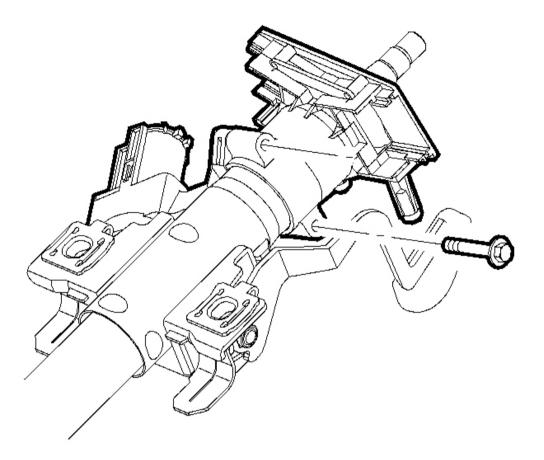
Lock Housing Bolts Courtesy of GENERAL MOTORS CORP.
